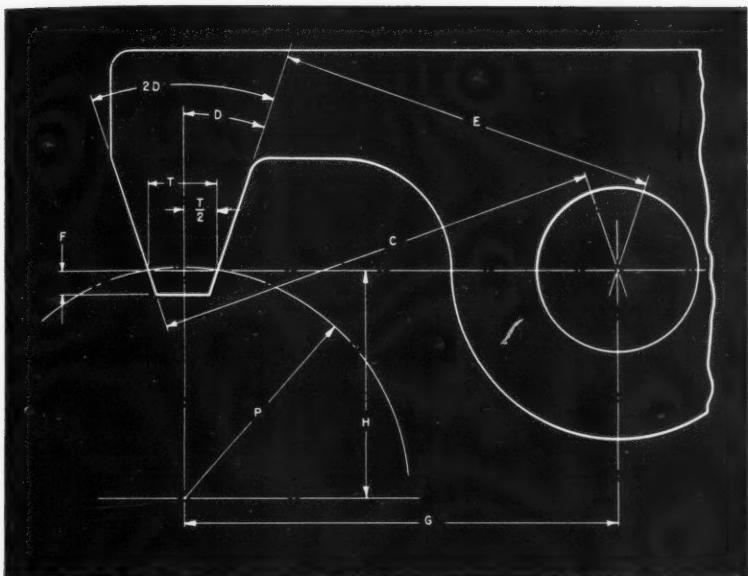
Pawl locator of the type employed to position a part or assembly with relation to a tooth space in an external gear
